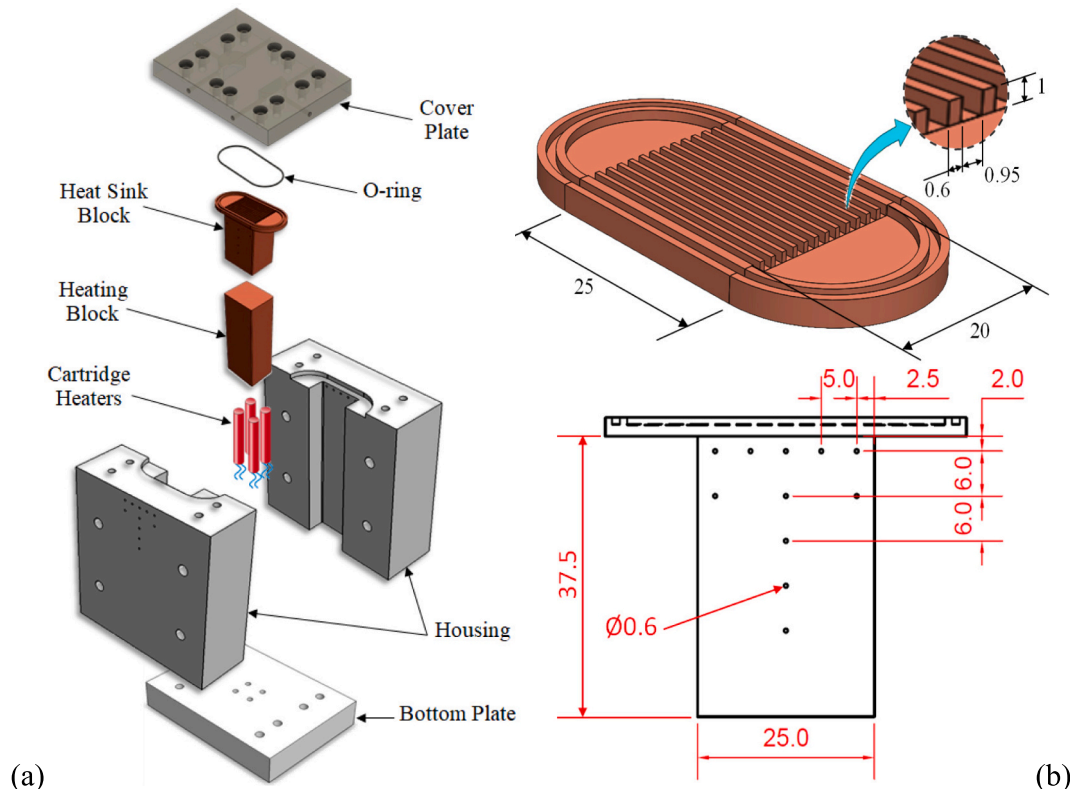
Multi-channels test section: (a) exploded drawing, [45] (b) heat sink. Dimensions in mm.
